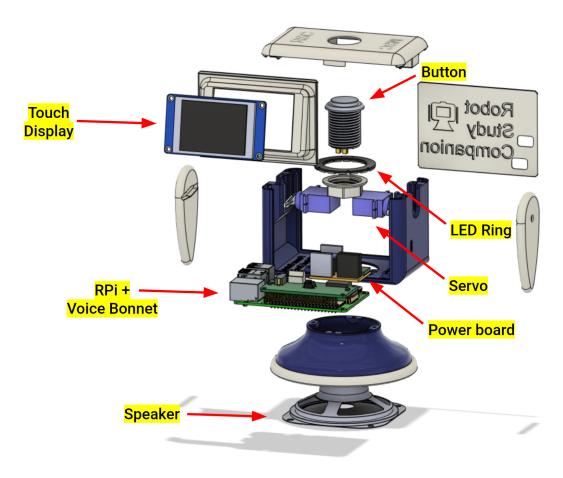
Exploded view of the RSC showcasing its internal components and structure.
